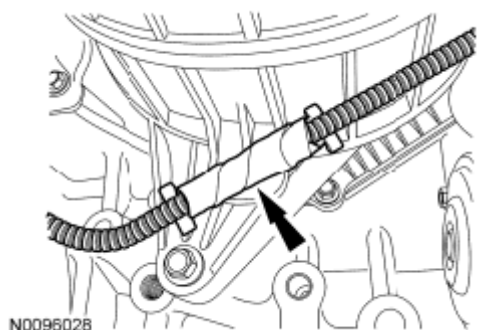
Locating A/C Compressor Wiring Harness Pin-Type Retainer
